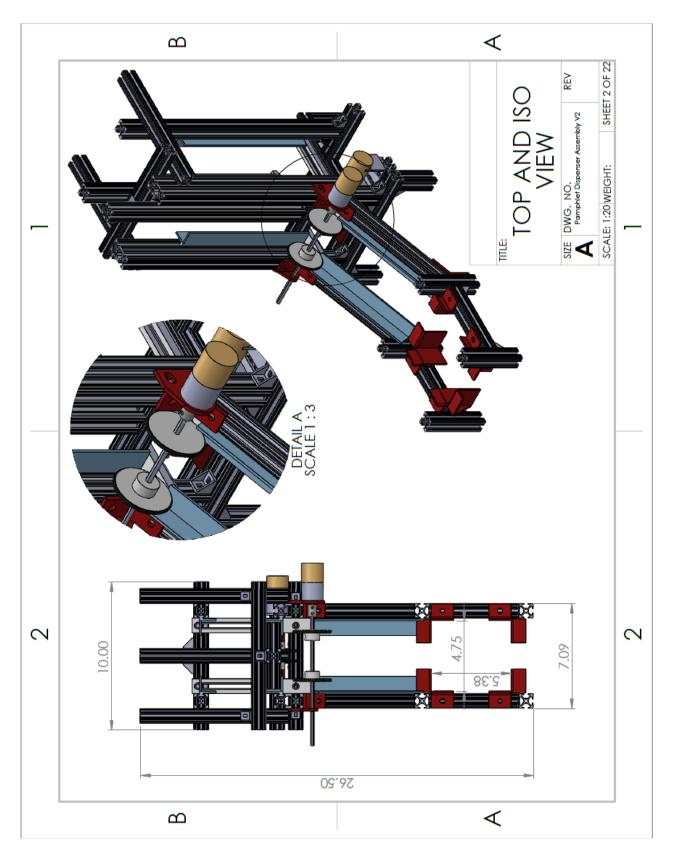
Pamphlet Dispenser Assembly Drawing (not to scale)
